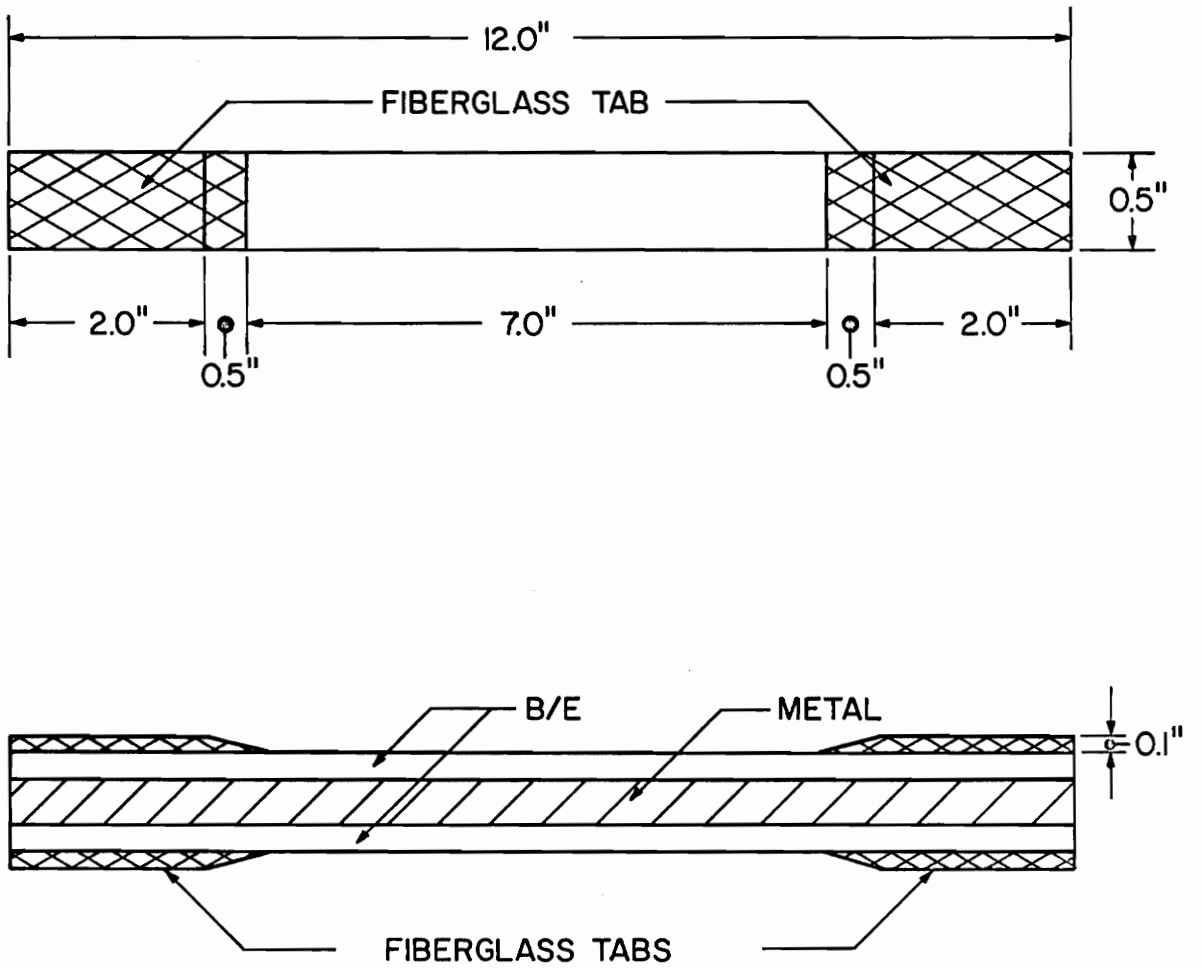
TYPICAL DIMENSIONS OF COUPON SPECIMEN
